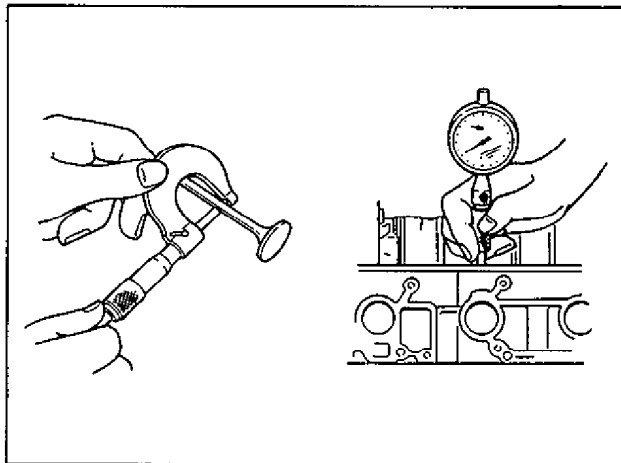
A-81 Valve Stem Dia. and Valve Guide I.D. Measurement
